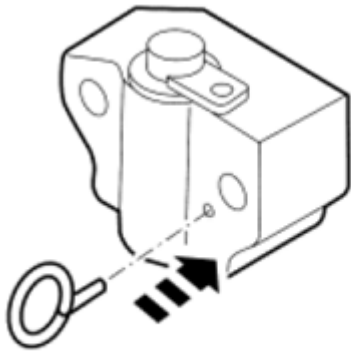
Holding Ratchet Mechanism Using Small Screwdriver Or Pick
